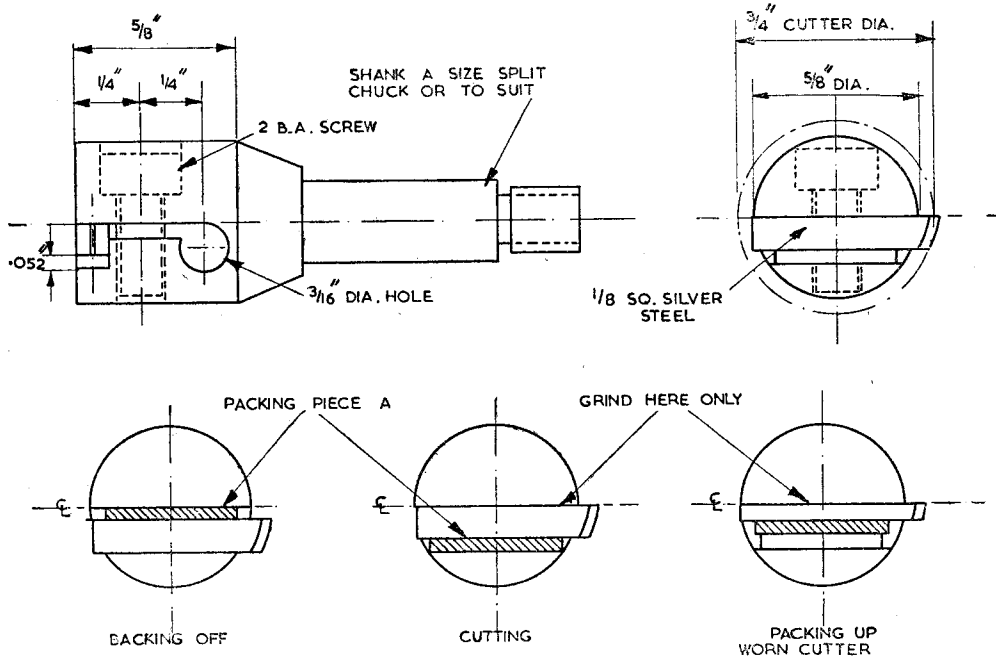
A single-point flycutter spindle for both backing off cutters and form-milling gear teeth
